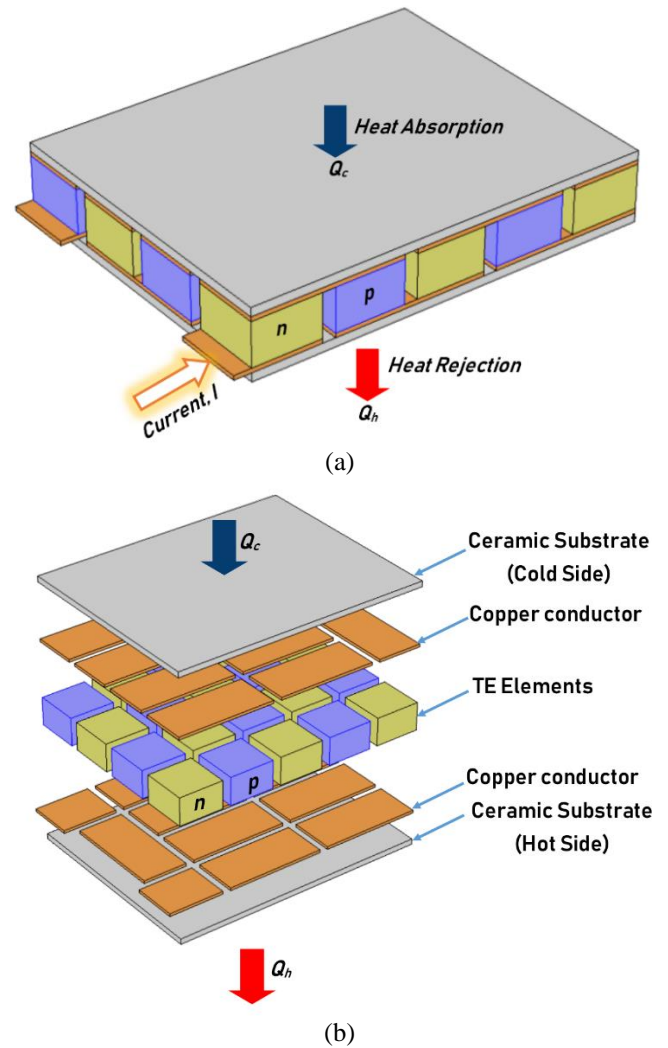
(a) Single-stage TEC (b) Exploded view of TEC
